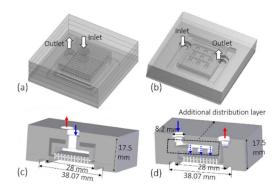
CAD structure for the large die cooler: an overview of (a) design 1 and (b) design 2. (c) and (d) Cross-sectional view of two microfluidic cooler configurations. Design 1 with nozzle array below coolant entrance connection and Design 2 with additional distribution layer to improve flow uniformity over chip surface.
